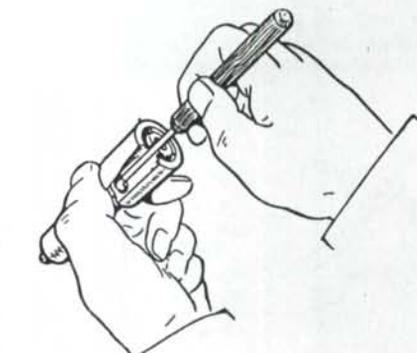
Insert special groove scraper until hooked nose of scraper enters fuel gallery. Press scraper hard against side of gallery and rotate nozzle to clear any carbon deposit from this area.
